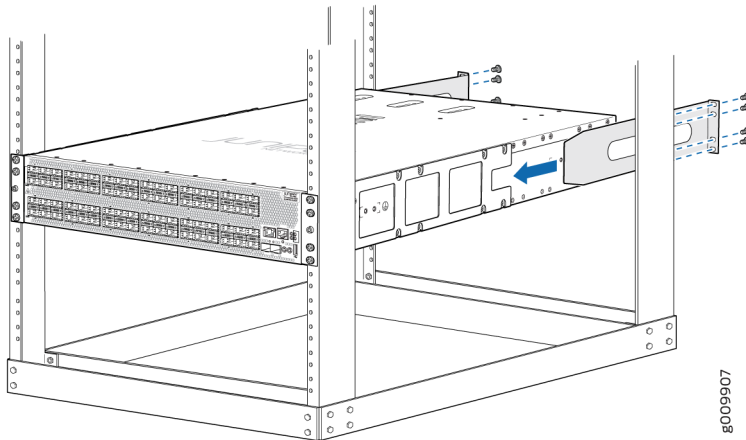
Attaching Front Mounting Rails (PTX10002-60C)
